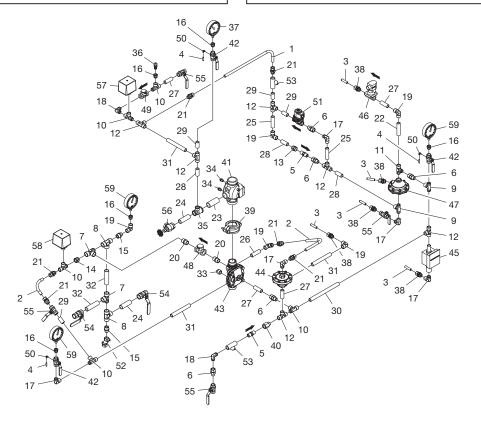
(1 OF 6) DN40 DV-5 PREACTION TYPE A TRIM ASSEMBLY EXPLODED VIEW
